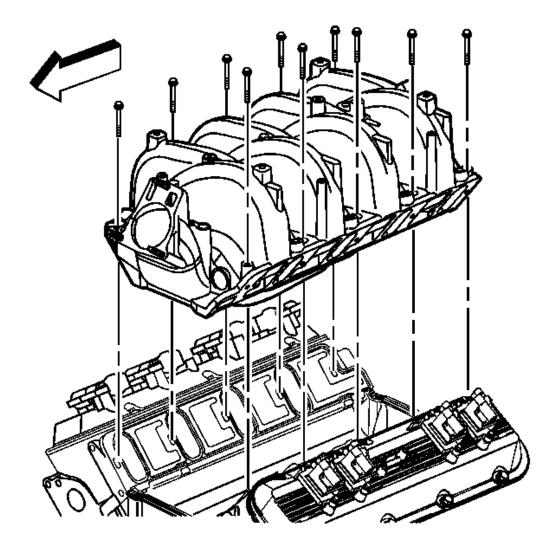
View Of Intake Manifold & Bolts Courtesy of GENERAL MOTORS CORP.
